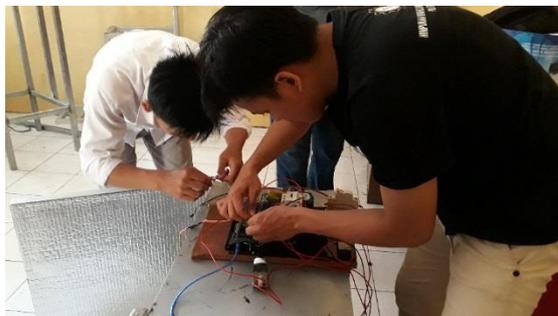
Advanced Stage of Dryer Machine *Final stage of dryer machine manufacturing
